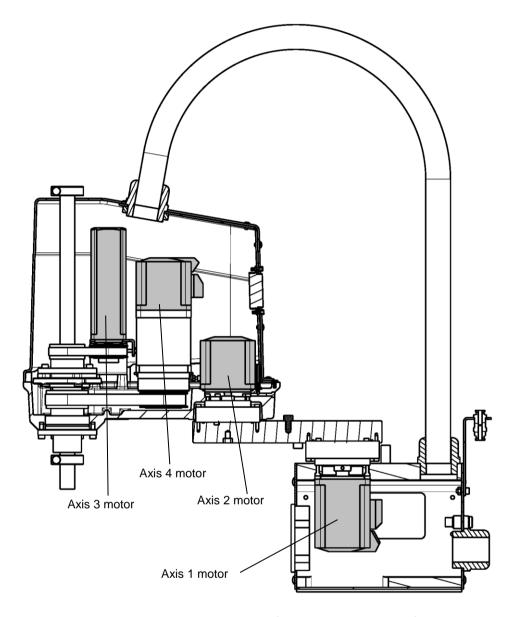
Motor locations (KHL-300, KHL-400)
